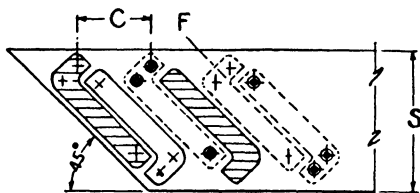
Scrap-strip design for cutting L-shaped blanks, two per press stroke.
